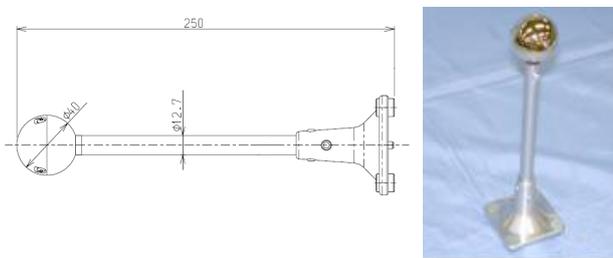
Diagram (left) and photo (right) of the PLAM sensor (dimensions in mm)
